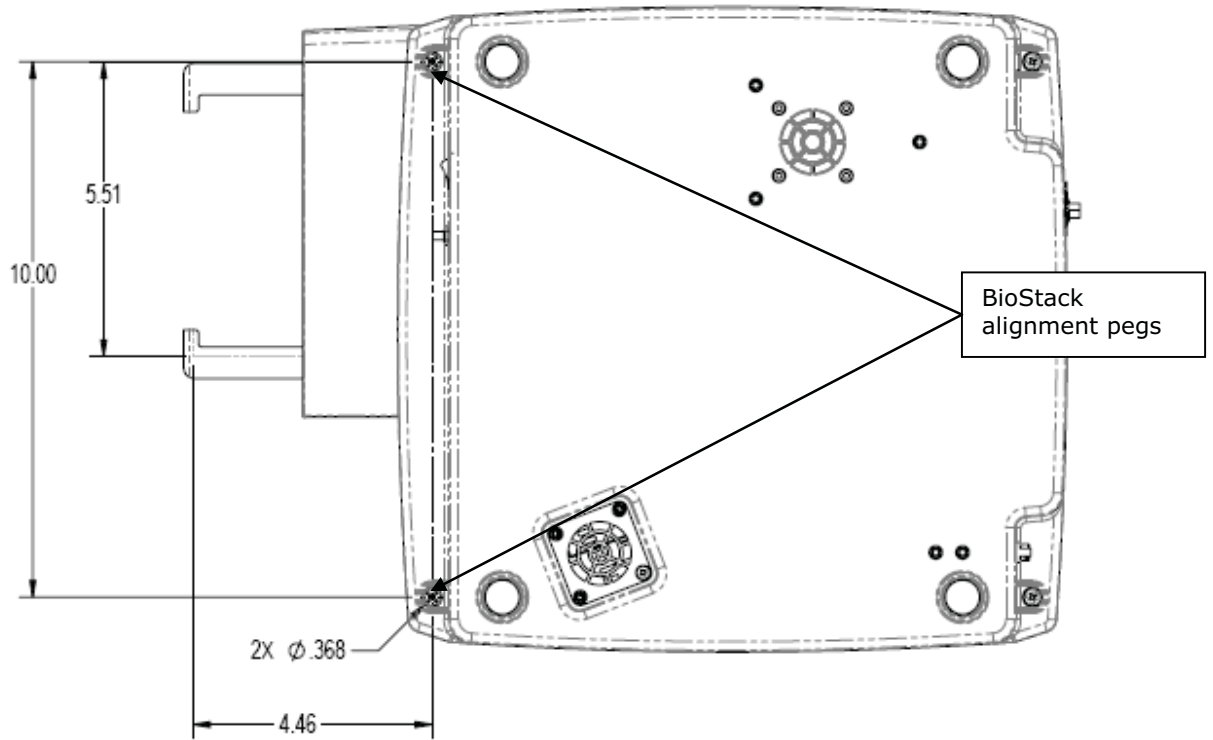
Bottom view of reader, illustrating mounting holes for aligning caps (for operation with BioStack)
